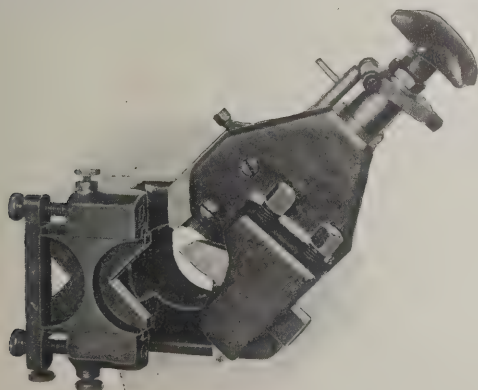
Standard Turning Tool for Bar Stock and Forgings.
